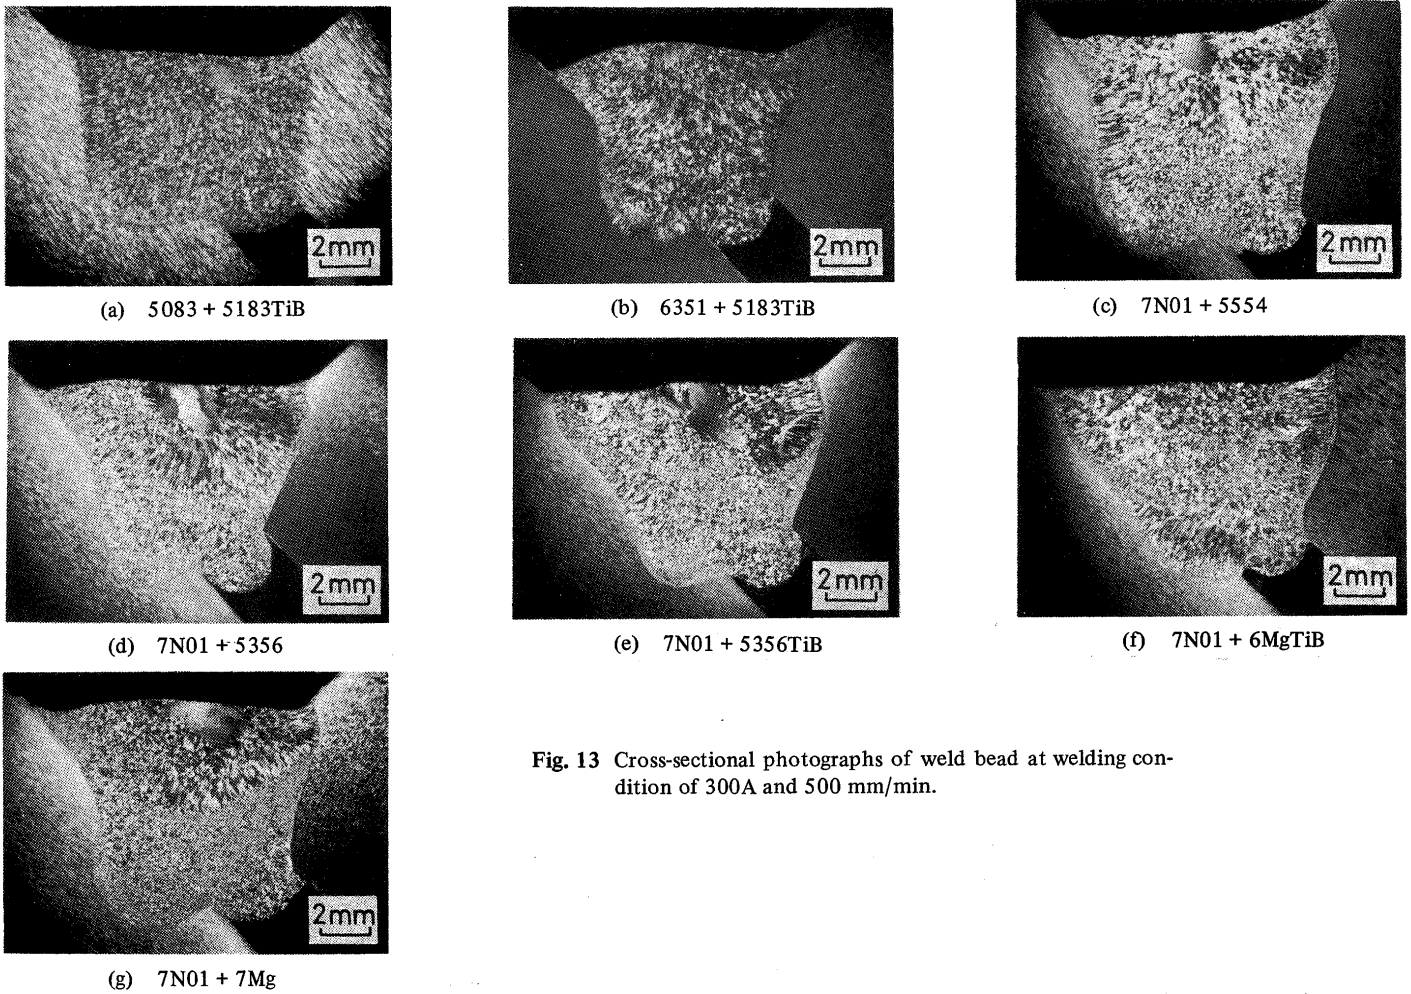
Cross-sectional photographs of weld bead at welding condition of 300A and 500 mm/min.
